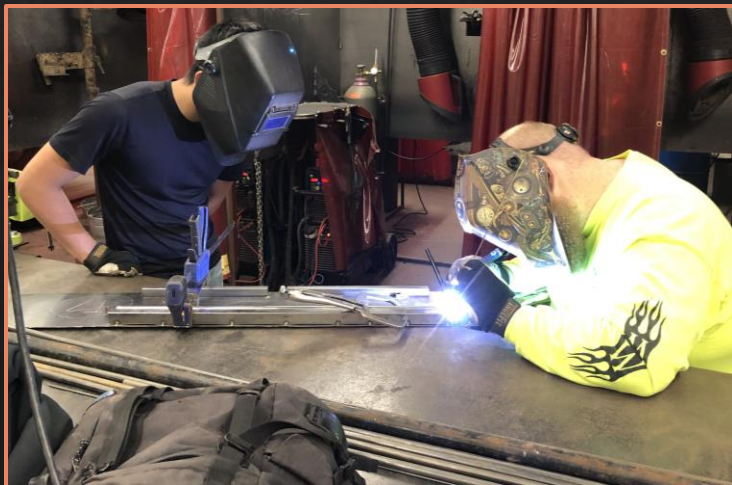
Andrew Lamer TIG Welding a Superstructure Member [2]
